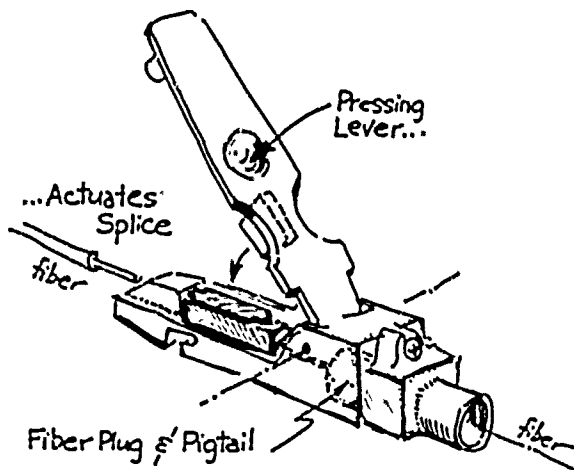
Plug-in With Integral Mechanical Splice Crimp Tool
